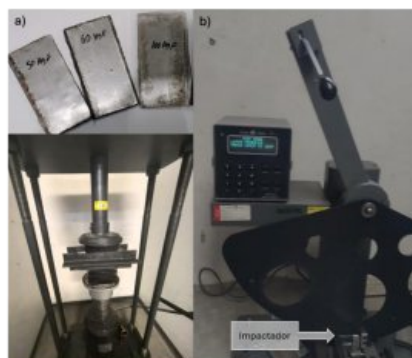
(a) Fabrication of multifunctional aluminum panels using a mold under different pressures; (b) device mounted on an Izod impact testing setup.
